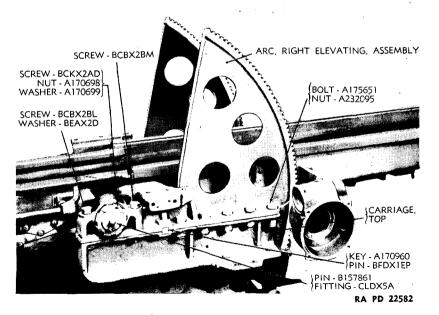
Right Side of Carriage — Elevating Mechanism Removed
